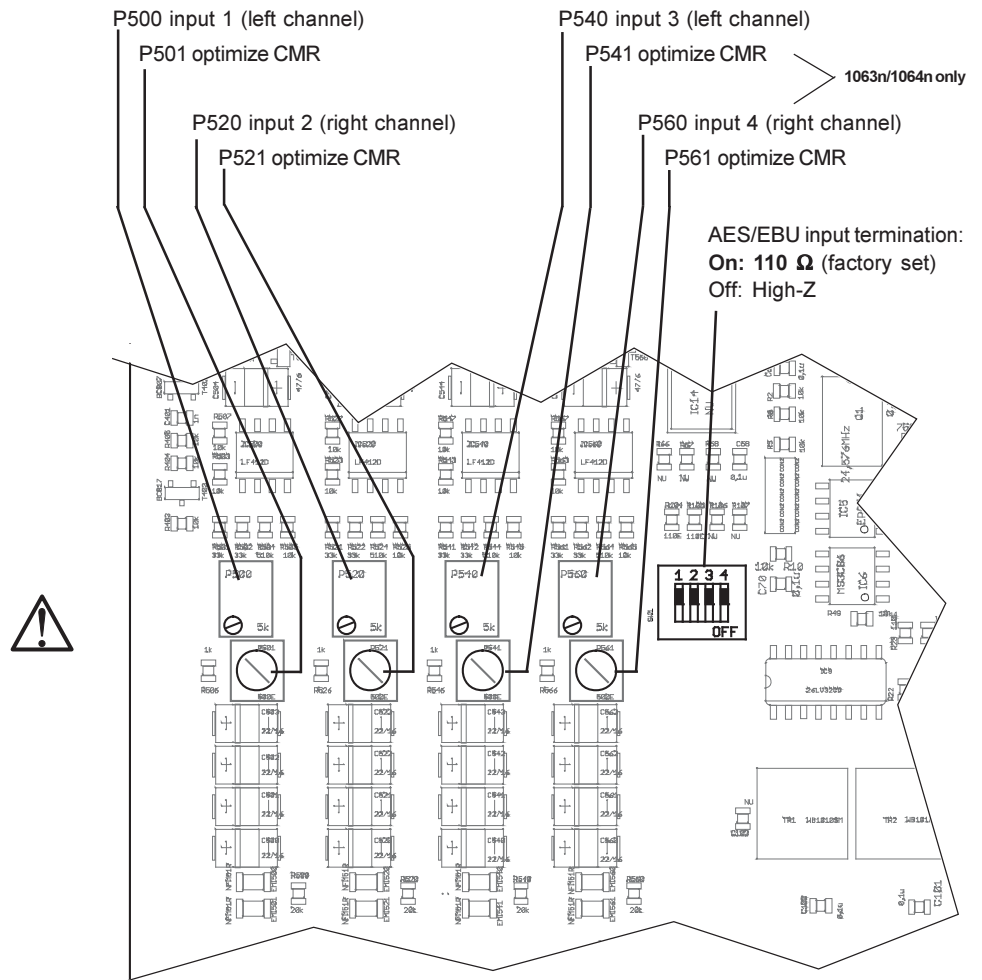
Partial view of input pcb (Example: 1064X)
